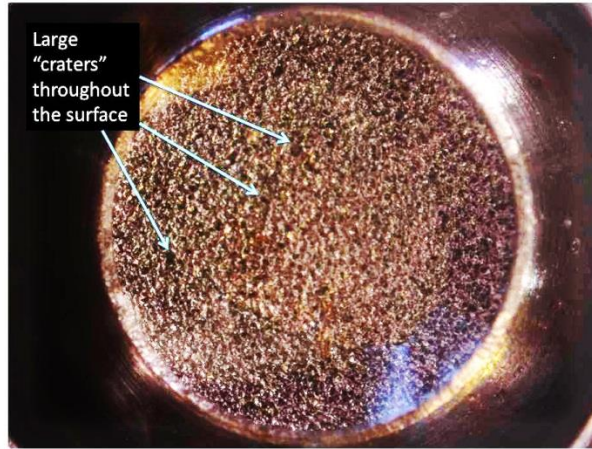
Emitter head image highlighting larger holes in the surface allowing propellant to quickly rise to the surface.
